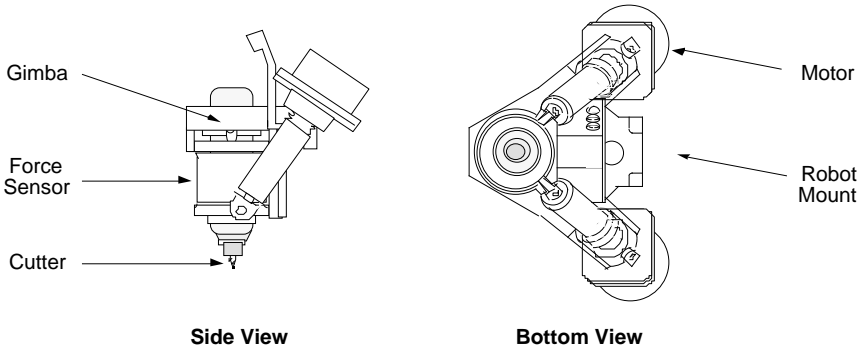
The Adaptive Deburring Tool. The tool consists of a high-speed spindle and rotary file mounted in a two degree-of- freedom motorized housing. Force transducers inside the tool monitor forces each millisecond, and a dedicated controller computes tool tip motion required to maintain a constant force.
